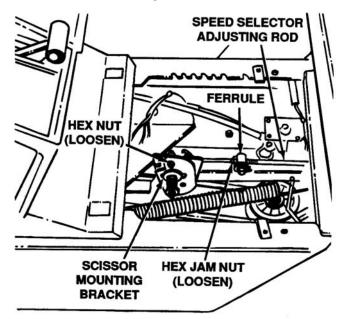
Loosening Nut on Adjusting Rod and Mounting Bracket
